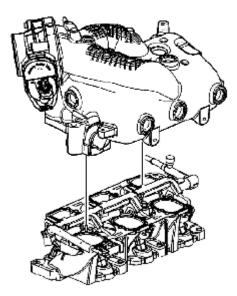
Identifying Upper-To-Lower Intake Manifold Gaskets Courtesy of SUZUKI OF AMERICA CORP.
